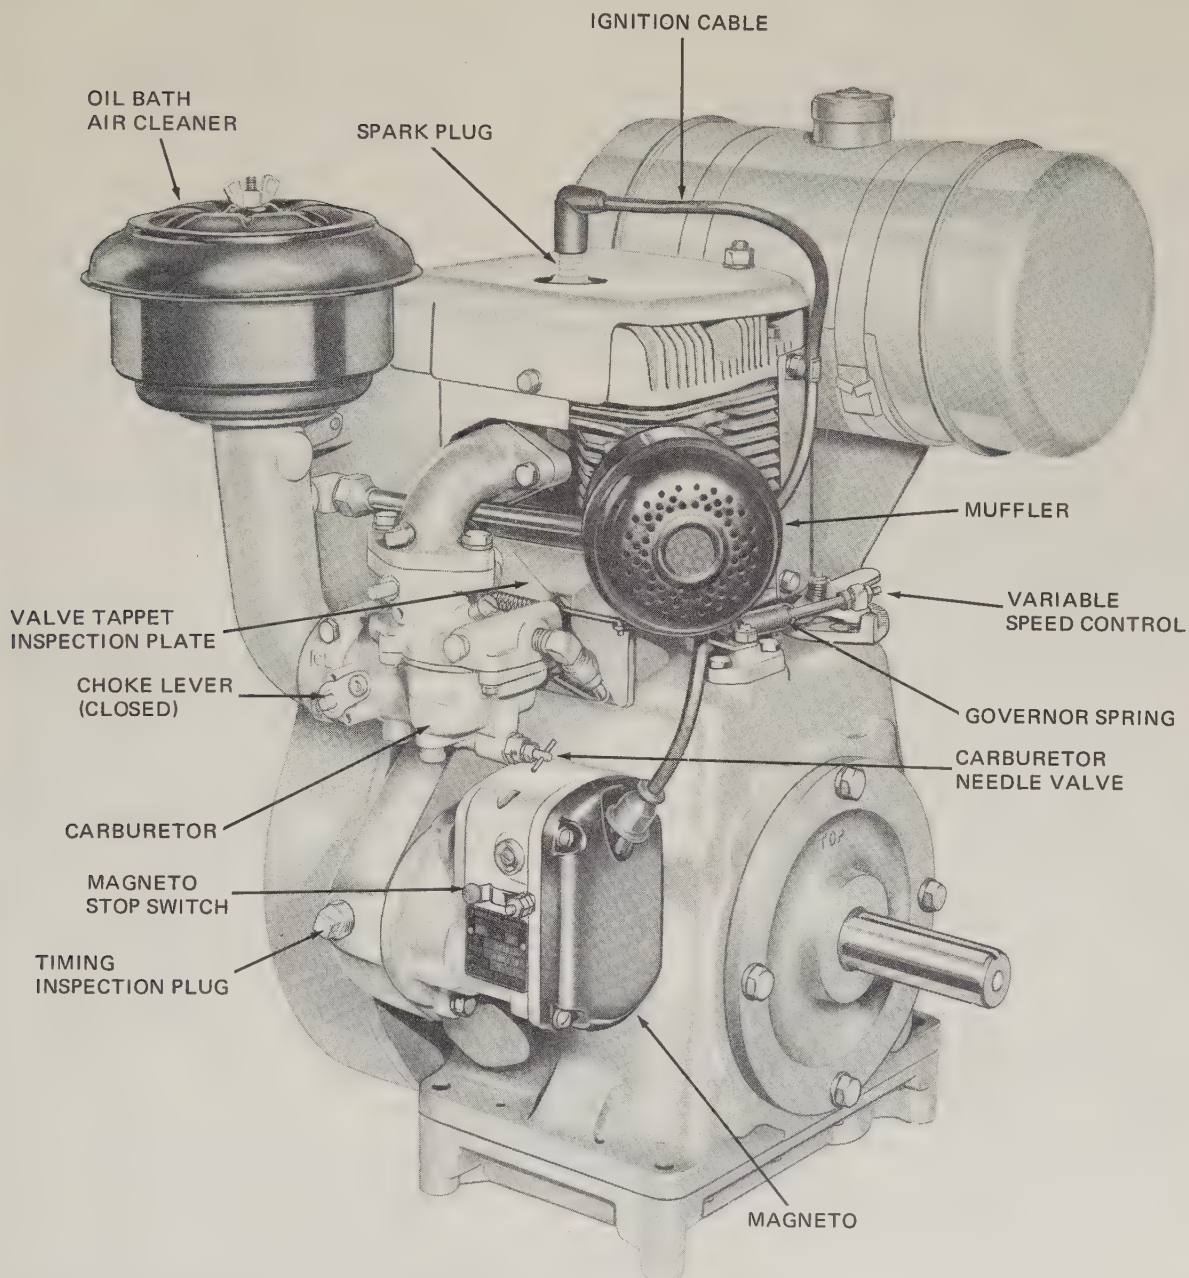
An externally mounted magneto on a one-cylinder four-cycle engine. (Wisconsin Motor Corporation)
